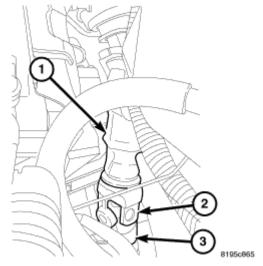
Identifying Intermediate Shaft, Coupler & Lower Coupler Pinch Bolt Courtesy of CHRYSLER LLC
